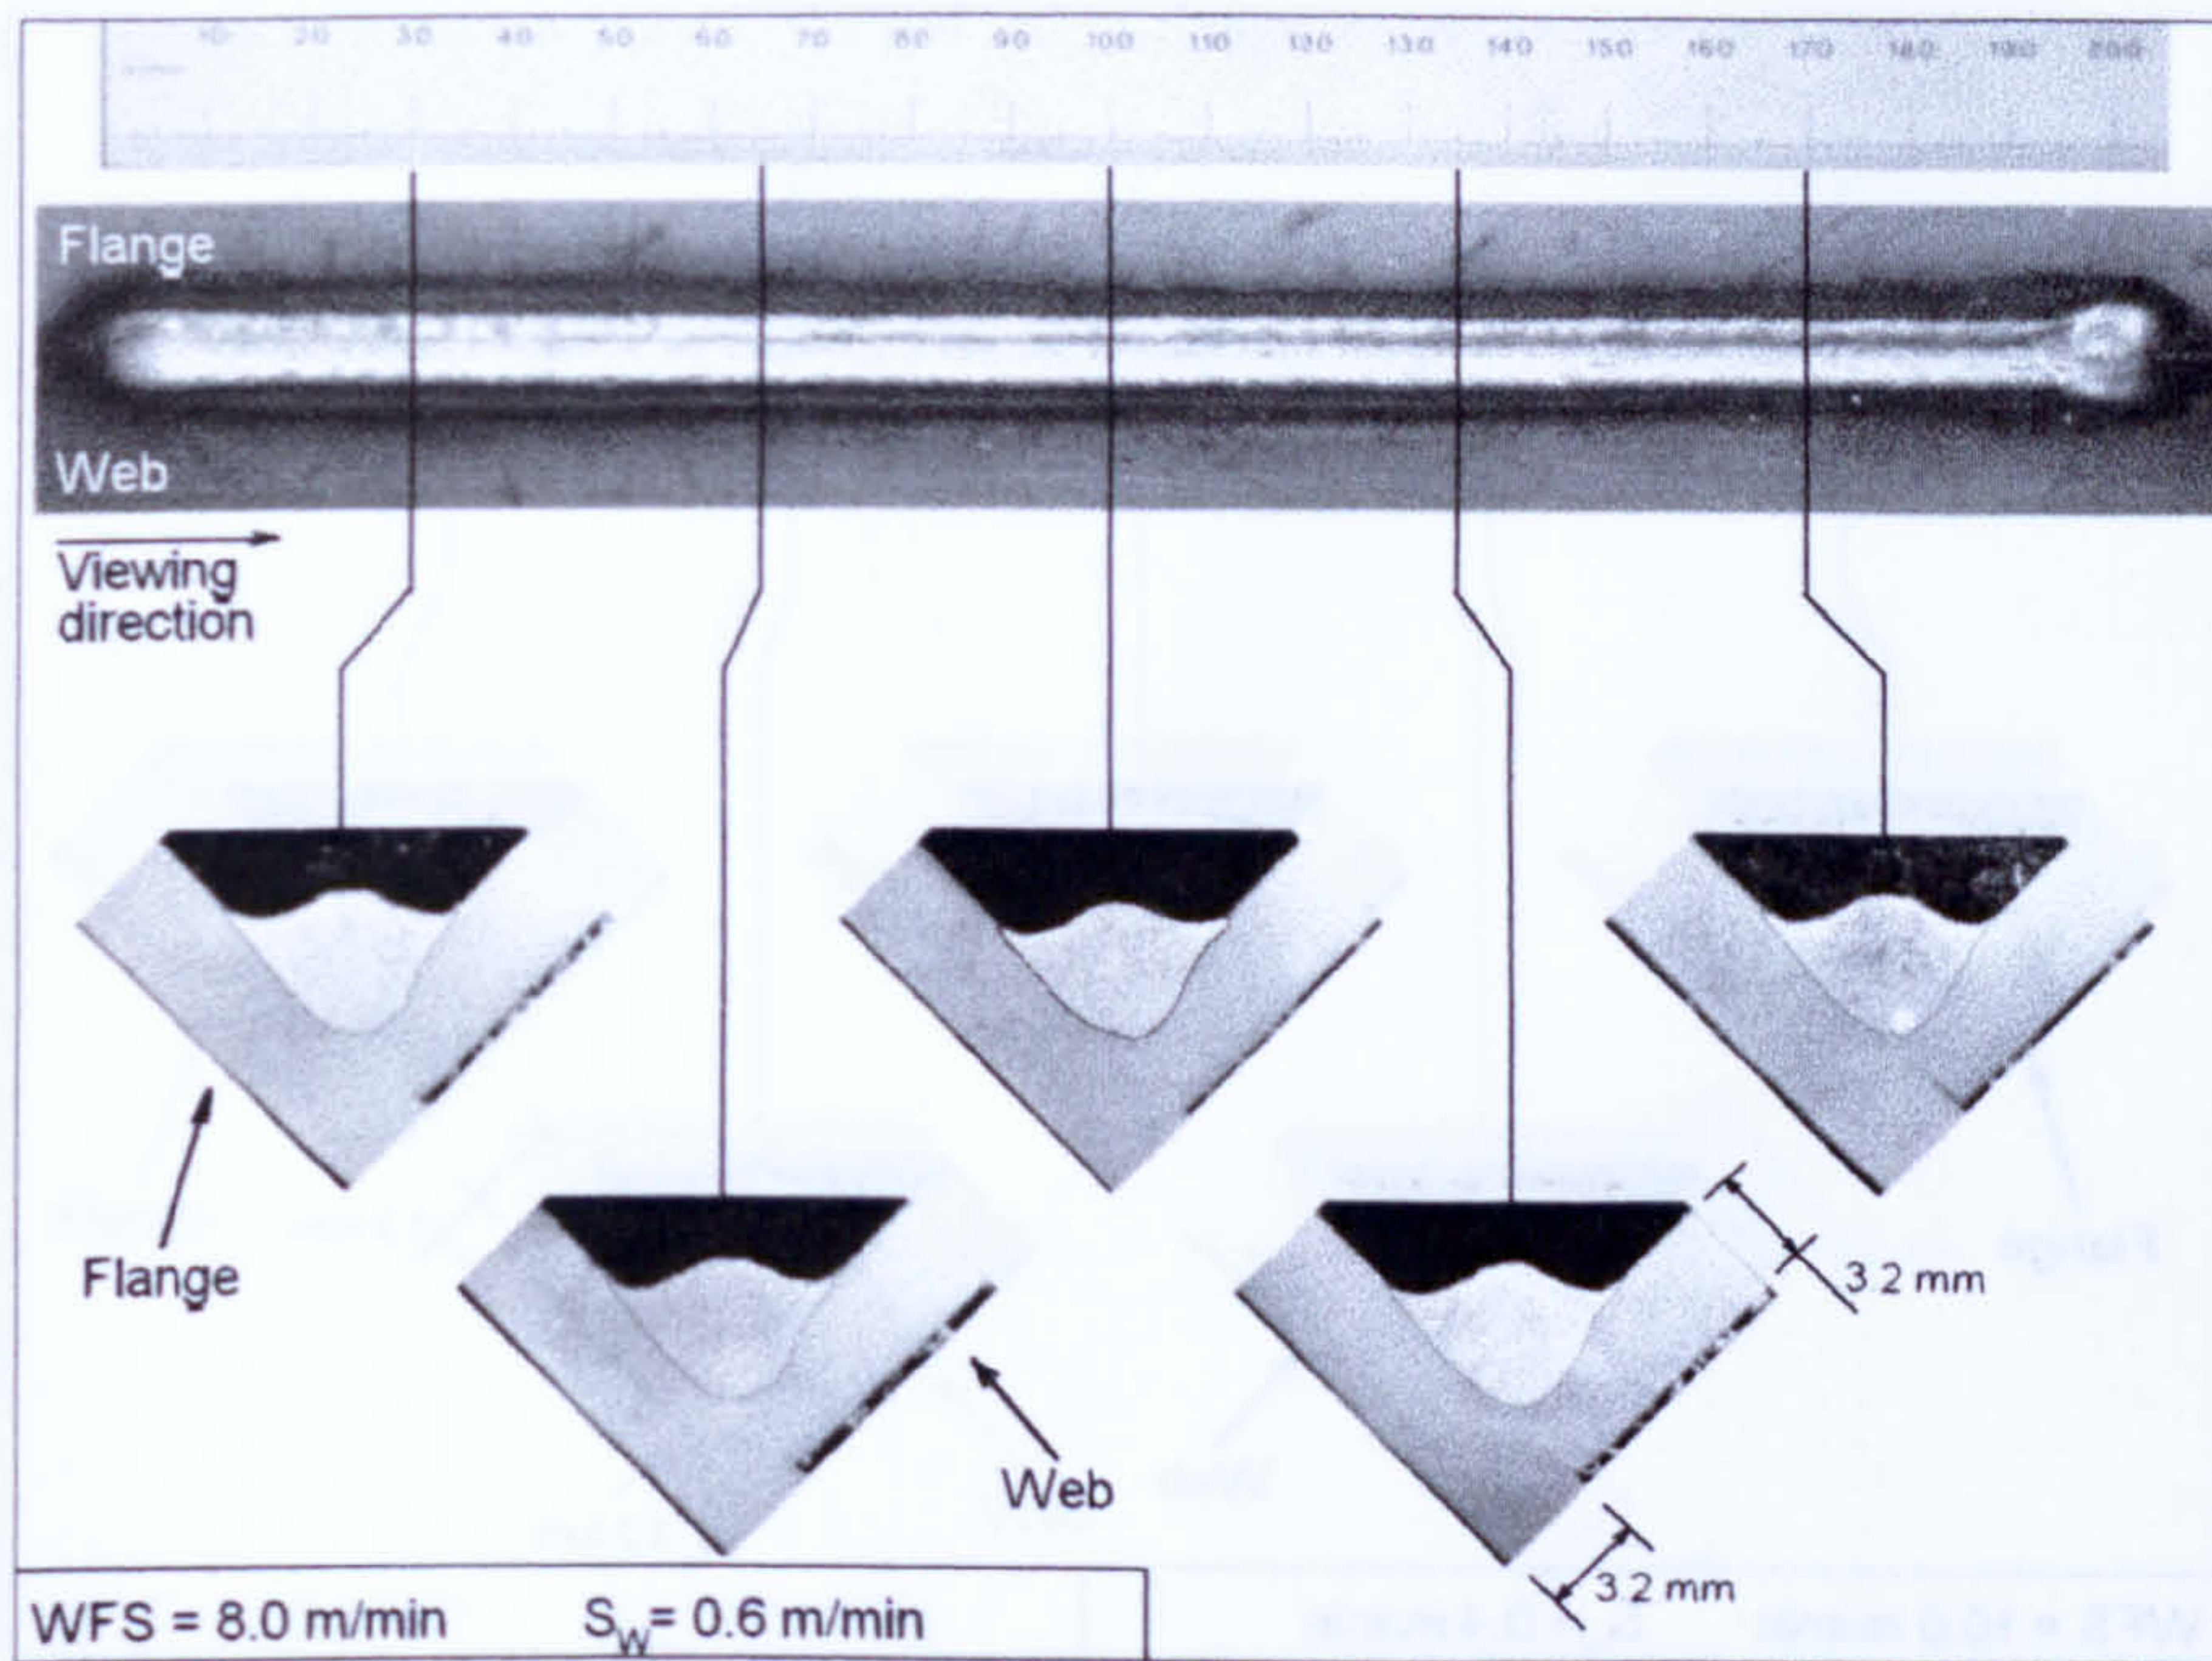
Bead appearance and bead profiles along the weld for the voltage and stand-off controlled welding trial "SV2".
